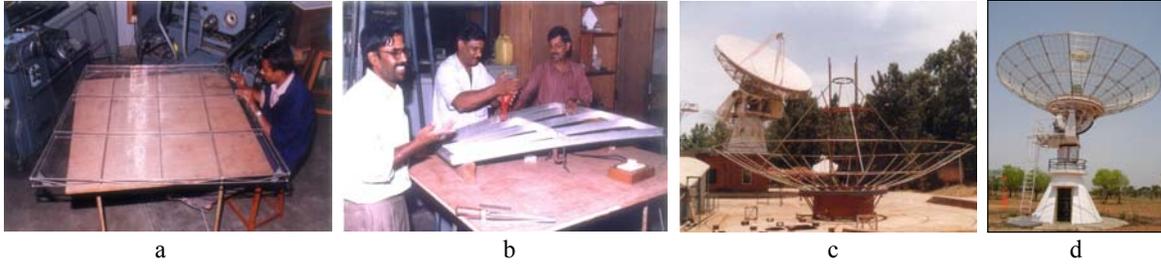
Reflector elements and dish assembly. (a) Mesh panel, (b) Aluminium panel, (c) assembled back up structure, and (d) completely assembled PPD telescope.
